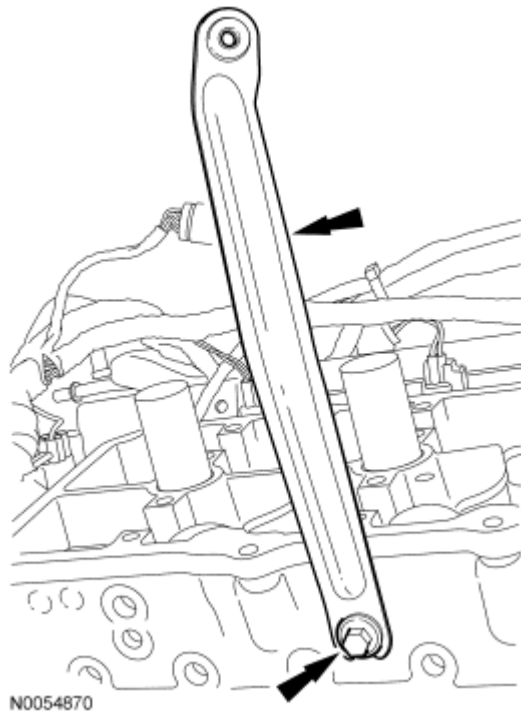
Locating Upper Intake Manifold Bracket & Bolt
